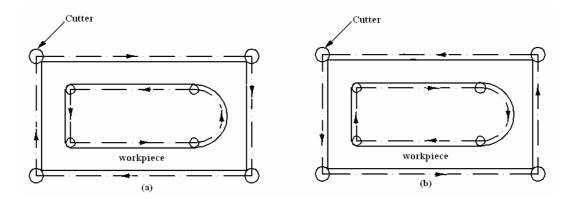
Milling cutter diameter compensation: (a) to the left; (b) to the right
